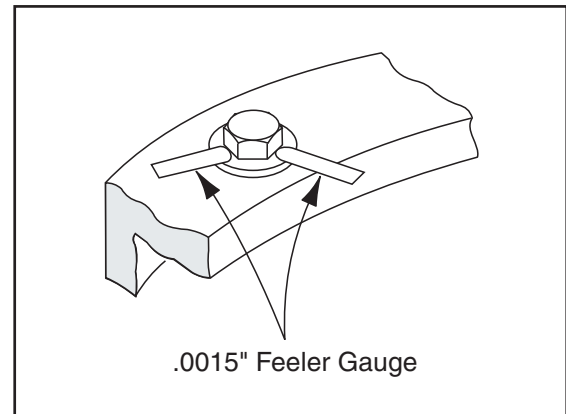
Swing Bearing Bolt Feeler Gauge Check
